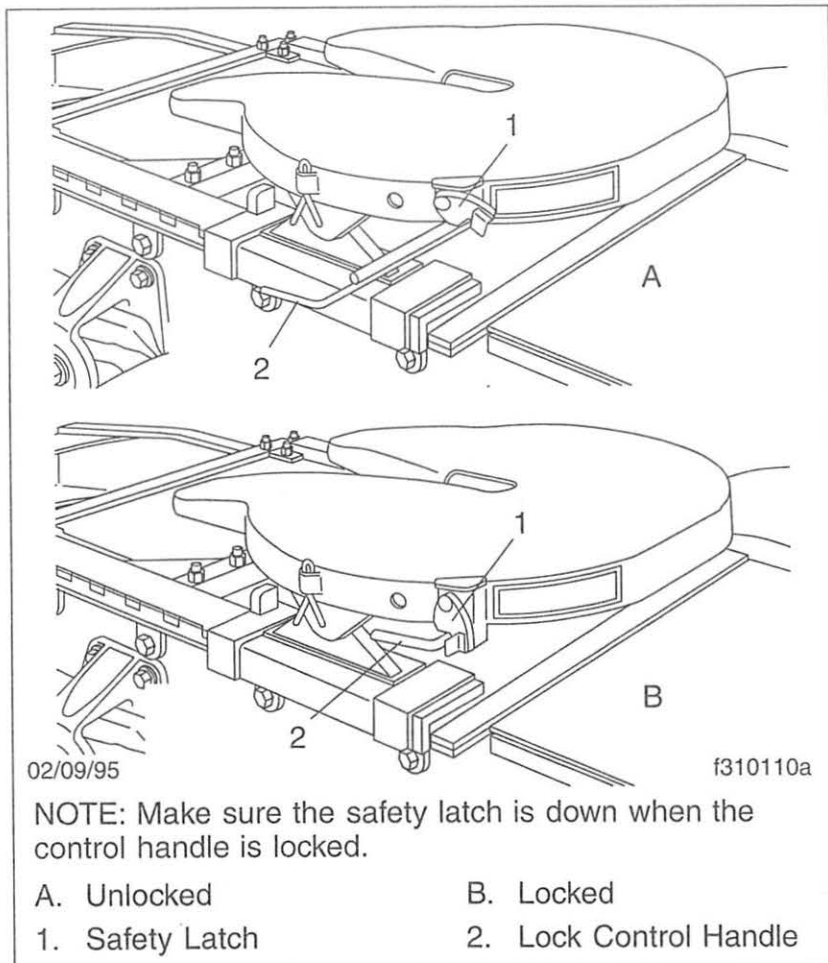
, Fontaine Fifth Wheel, Locking and Unlocking
